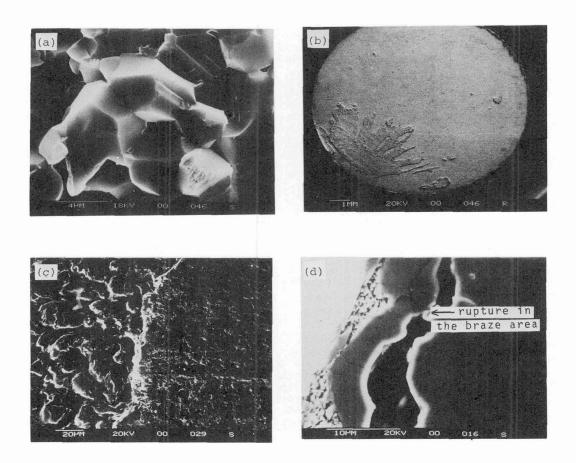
~ (a) Fracture surface of a TA6V/Al $_2$ O $_3$  sample, (b) Fracture surface of a TA6V/ZrO $_2$  sample (ceramic part), (c) Higher magnification of the micrograph shown in (b), (d) Perpendicular section of the surface fracture (metal part) .
